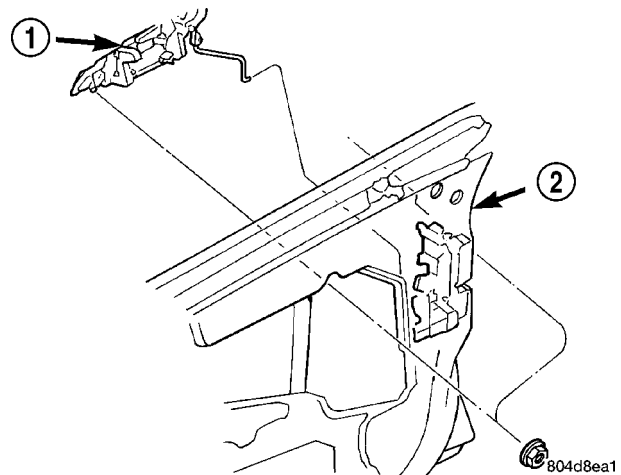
OUTSIDE DOOR HANDLE - JR27 ONLY
